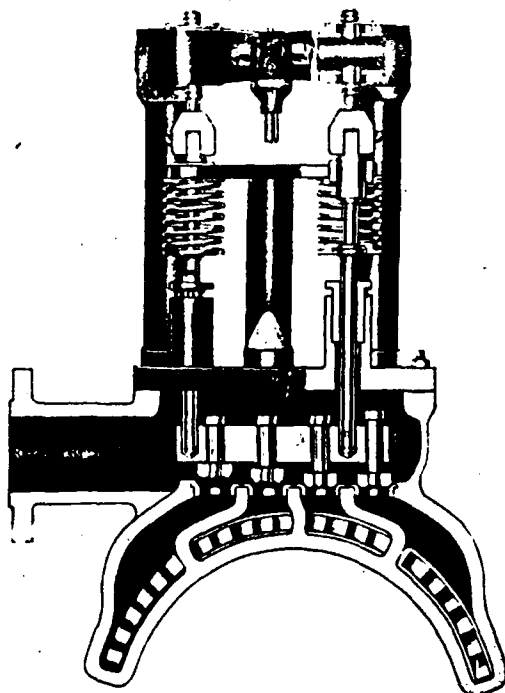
TYPICAL THROTTLE AND EMERGENCY TRIP VALVE
